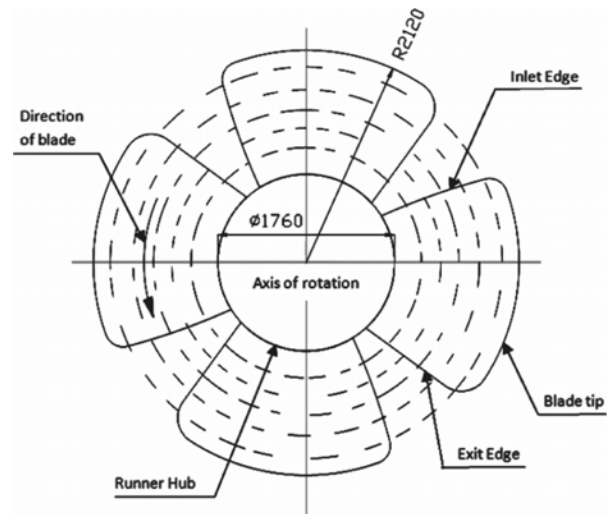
PLAN VIEW OF RUNNER BLADE ASSEMBLY
